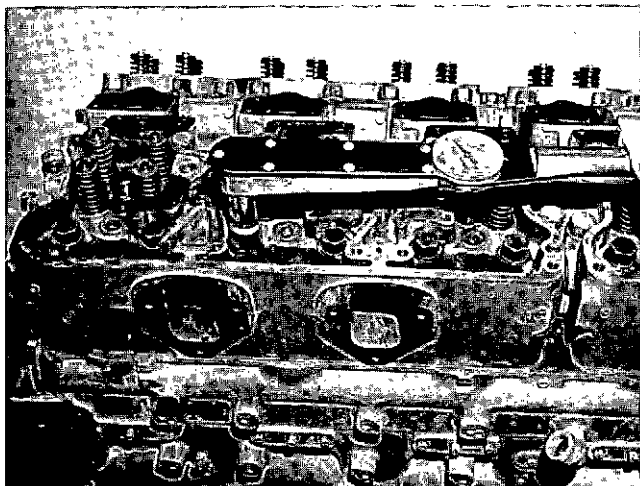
, V414142. Tightening cylinder head capscrews
